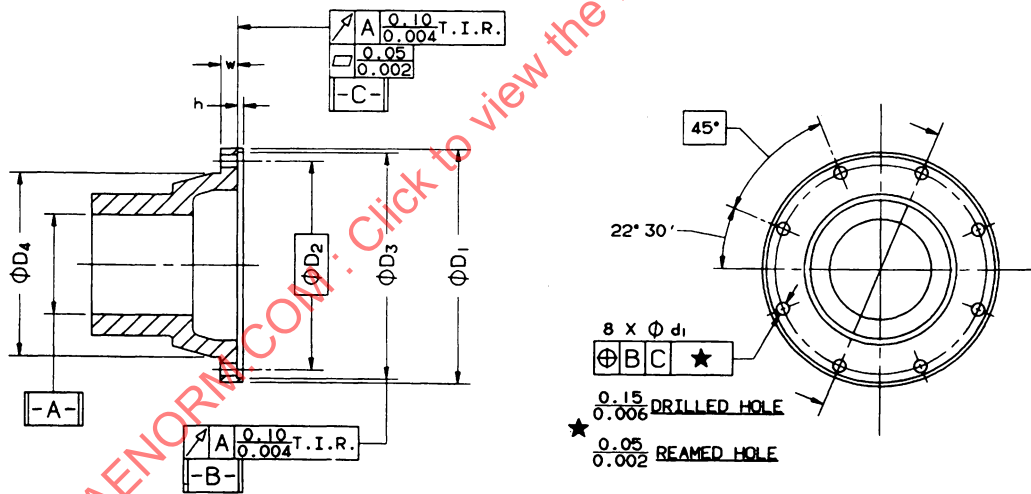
TYPE S COMPANION FLANGES—TRUE POSITION, FLATNESS AND RUNOUT TOLERANCES—mm/in
